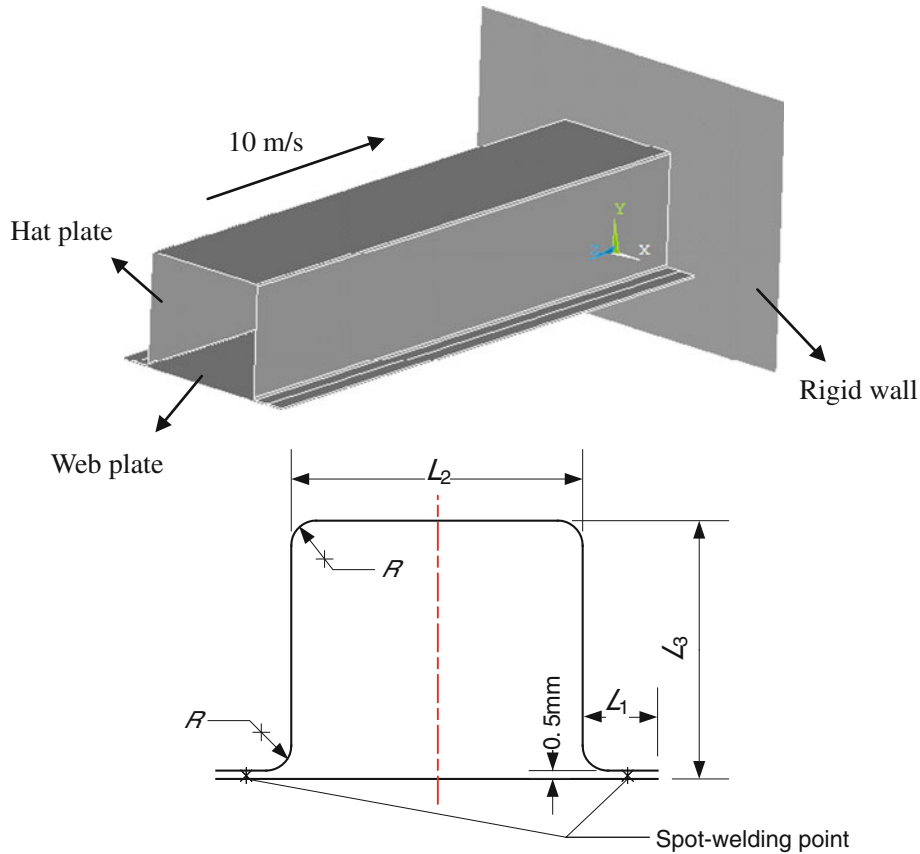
A closed-hat beam impacting a rigid wall and its cross section [36]
